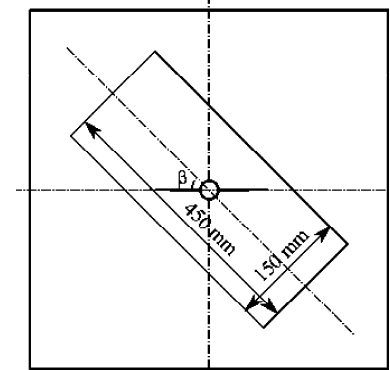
Cutting of the initial plate to obtain an inclined centre crack tensile specimen.
